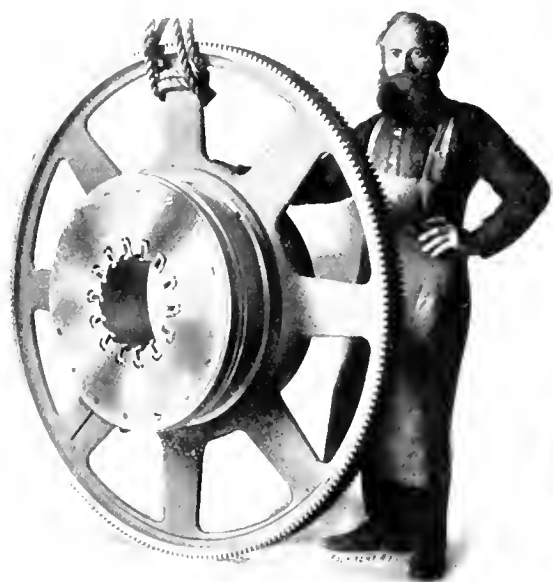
Main Driving Gear of the Gorton Cutting-off Machine
